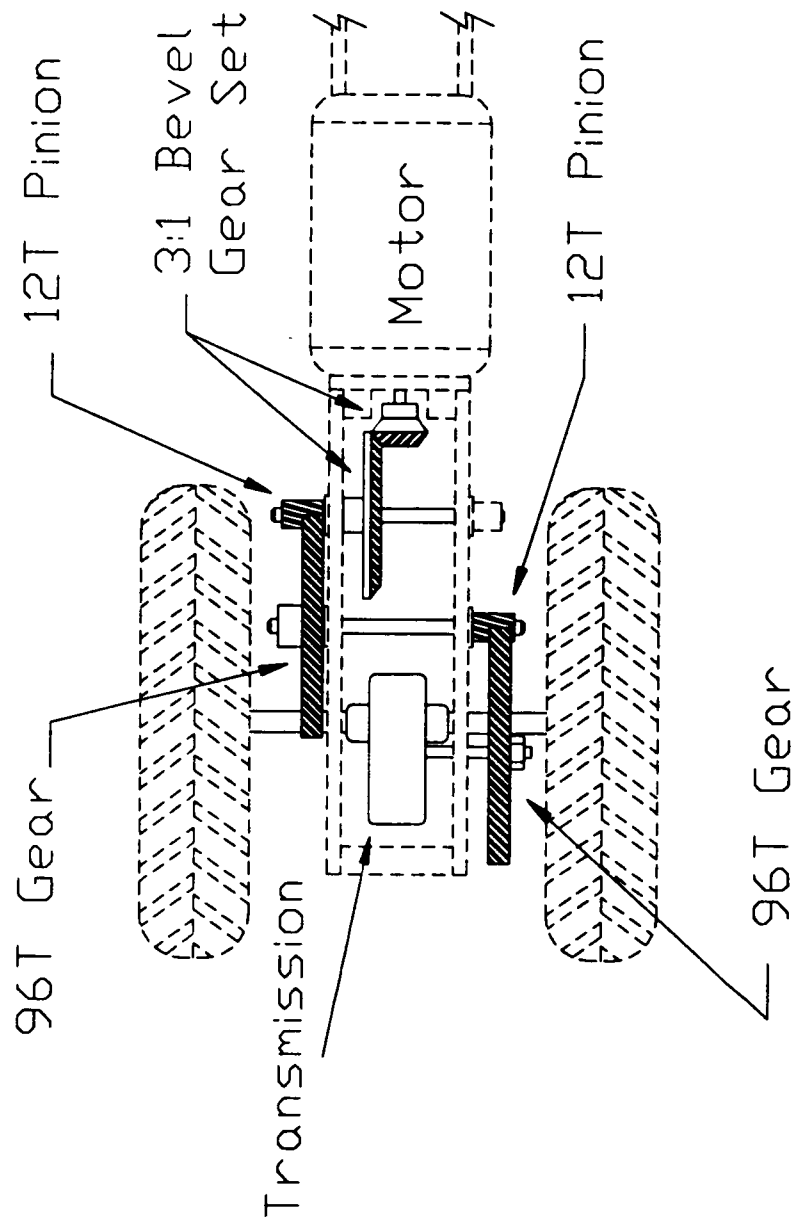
Power train for RC tractor illustrating location of gears, transmission, motor and drive axle.
